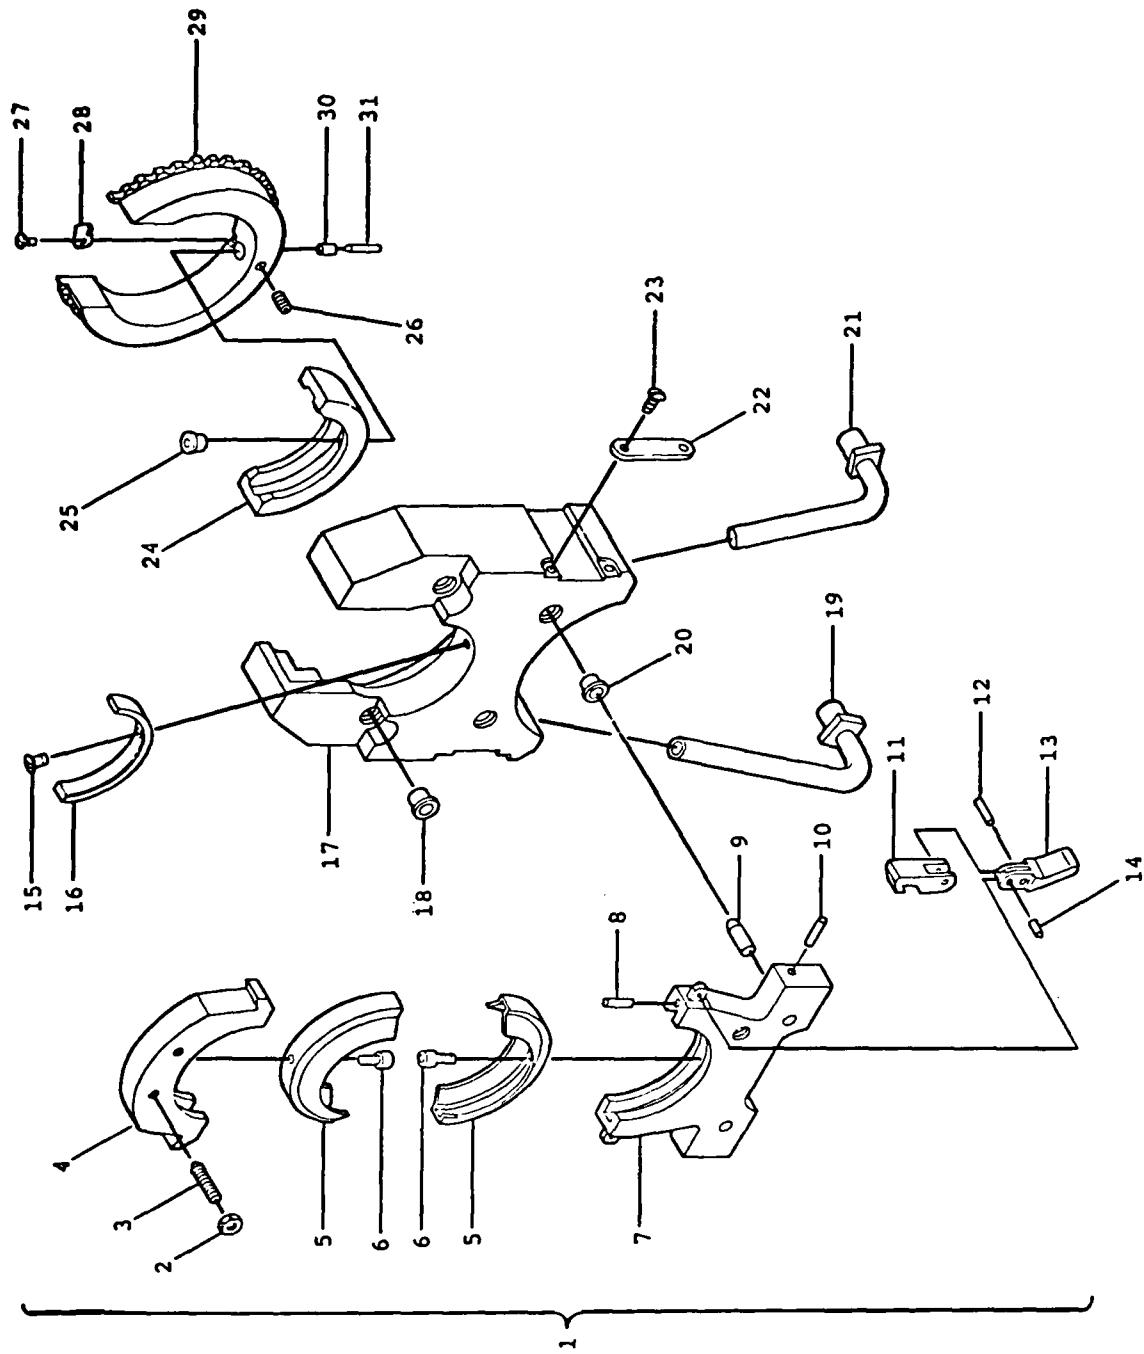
Lower Housing Assembly Special Open End Weld Head
